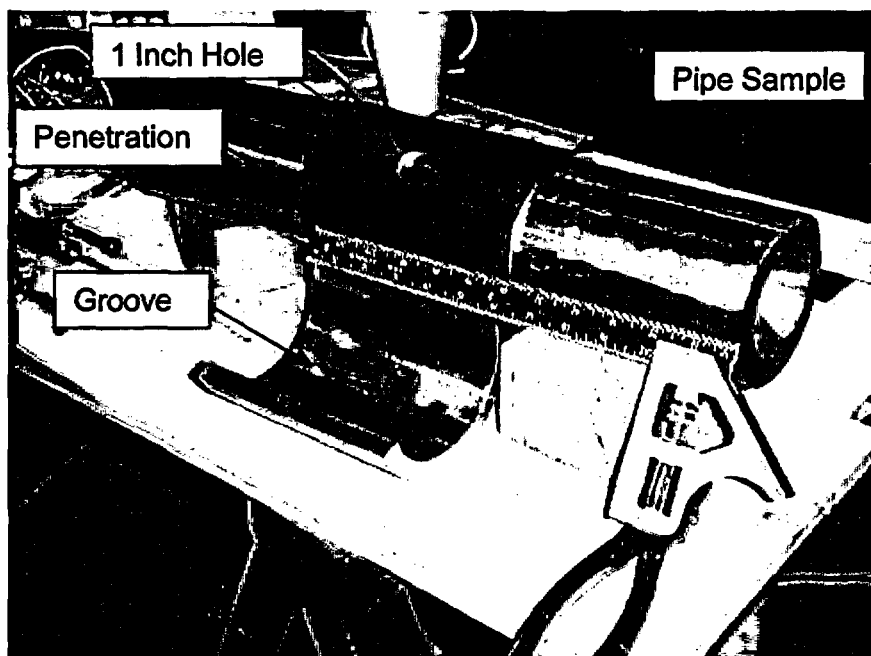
The tube sample with the through wall holes mounted on the penetration tube. In front is the groove Sample SK-WB08-04.
